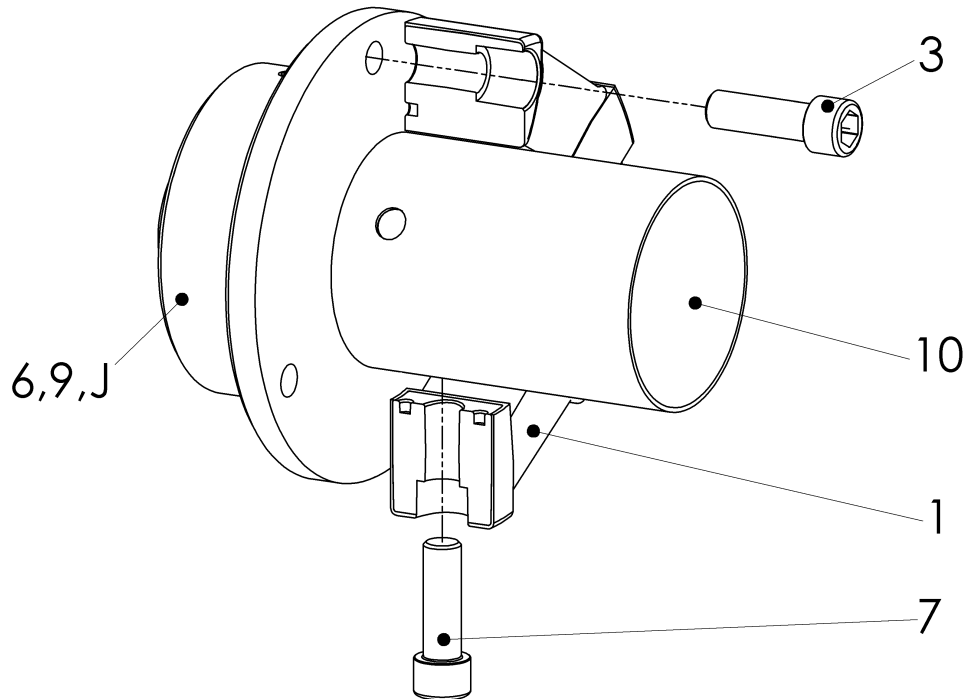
Mounting the rubber elements (coupling sizes 00001...00012)
